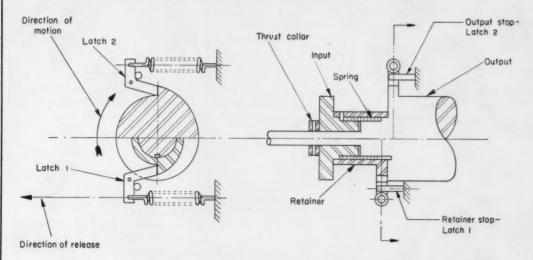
Typical one-revolution spring clutch designed for sudden engagement at output with input shaft. Section shows both stops in locked position.
